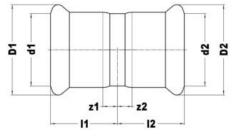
Dimensions (Example DN20) d1 = 22 mm; D1 = 32 mm l1, l2 = 26 mm; z1, z2 = 5 mm
